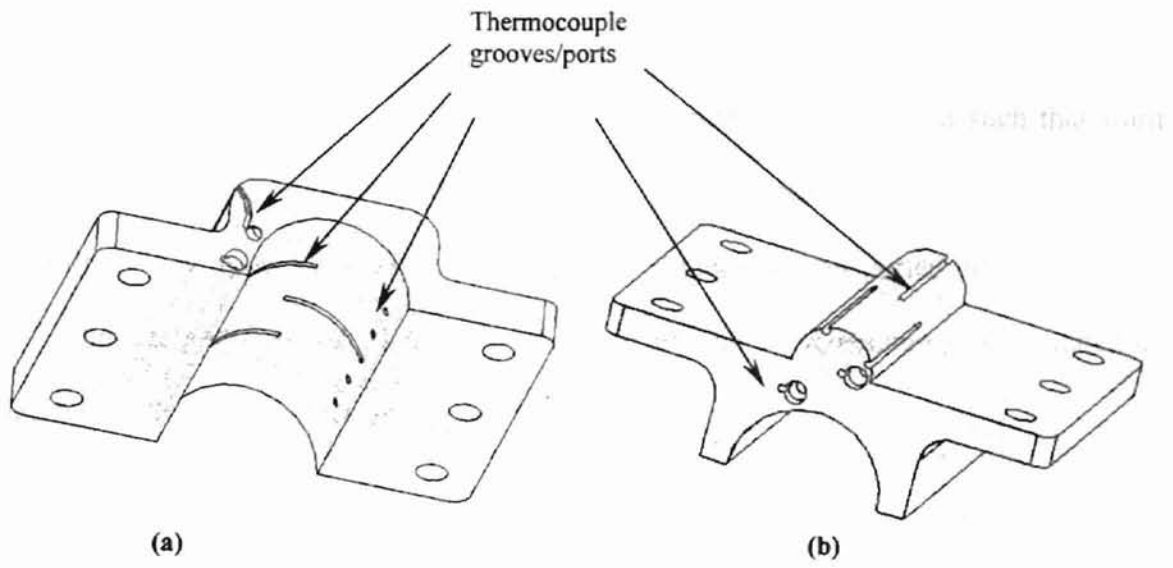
Second HX curing fixture design. (a) Upper half. (b) Lower half
